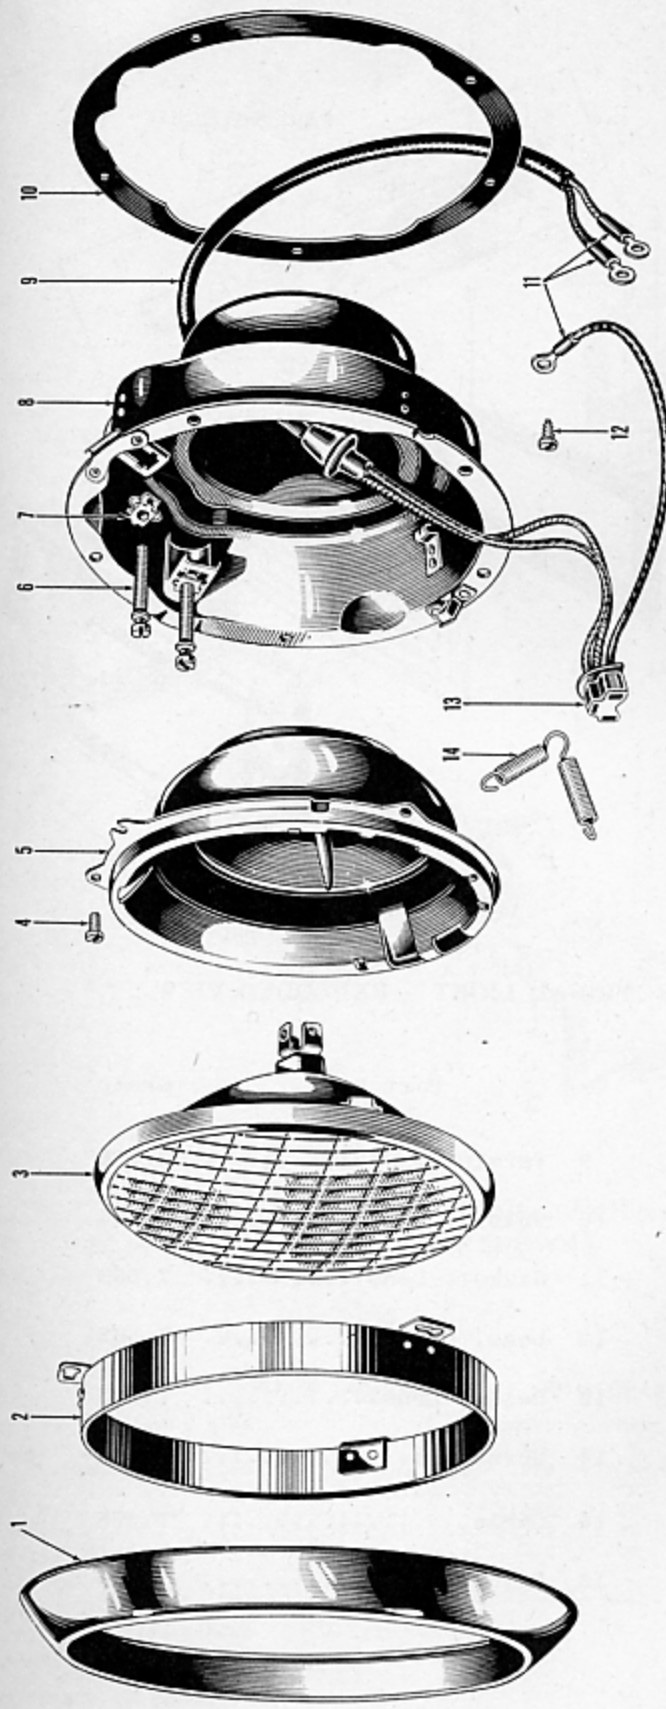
TYPICAL HEADLIGHT - EXPLODED VIEW
